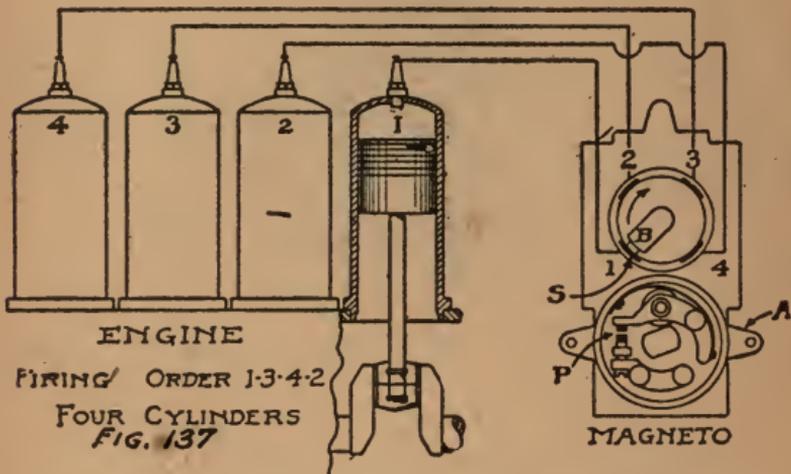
Timing K-W magneto to a four-cylinder engine.
